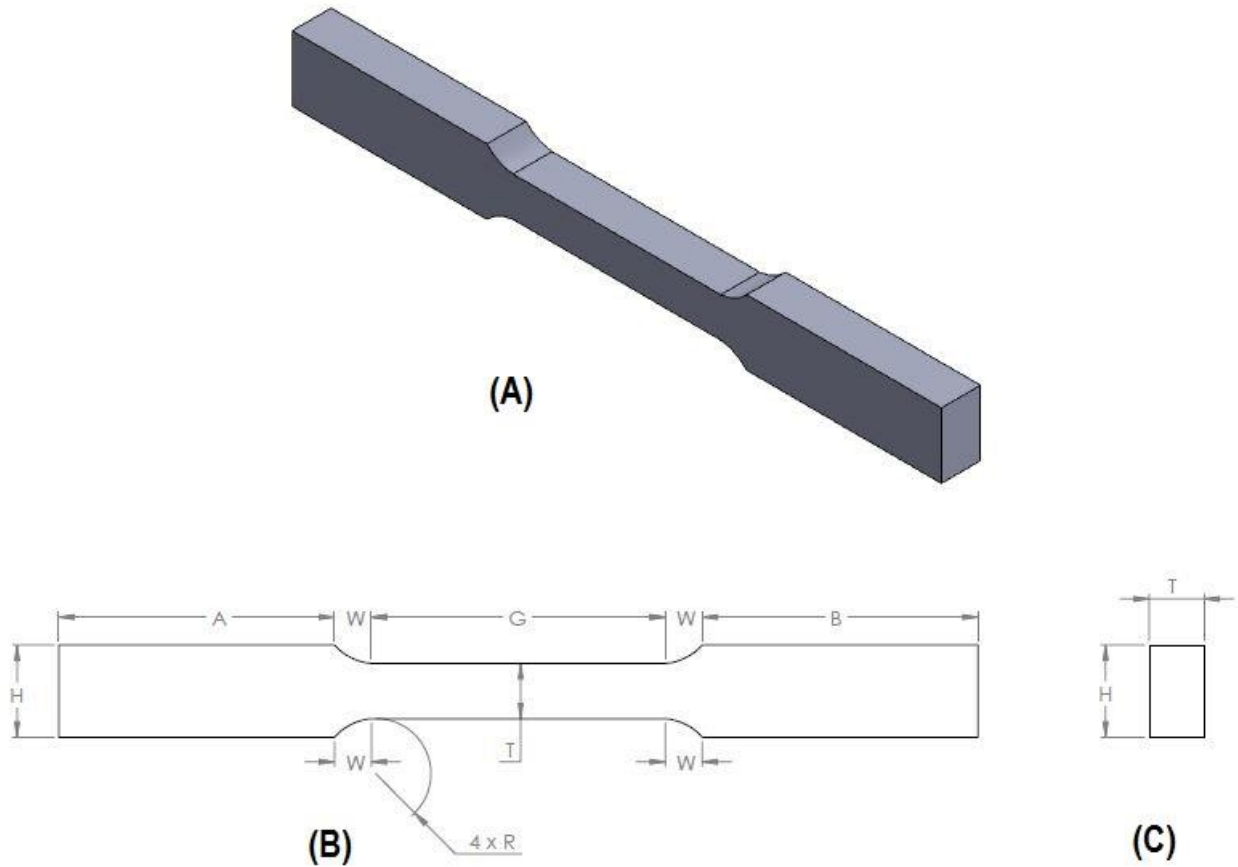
(A) CAD model of tensile specimen. (B) Orthographic front view of tensile specimen (C) Orthographic side view.
